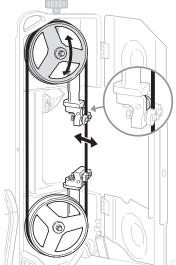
ADJUSTING THE BLADE TRACKING CONT.
